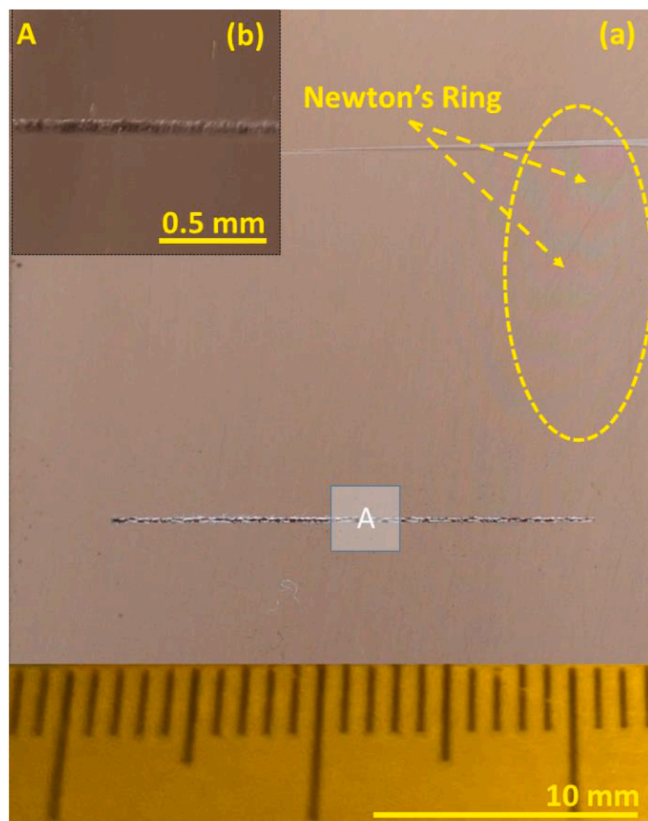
Optical microscope (OM) images from the CLSM demonstrating the successful attainment of line welded seams with the following processing parameters: $P = 16$ W, $v = 40$ mm/s, $f = 20$ kHz, and $N = 5$. (a) Top view of a 20 mm-long line weld seam. (b) A magnified CLSM image showcasing the excellent surface morphology achieved.
